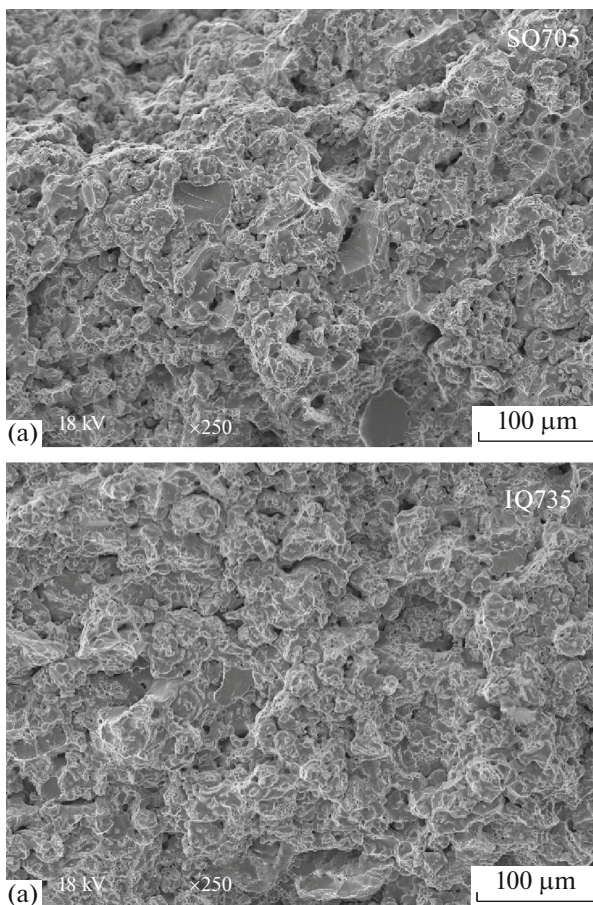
Fracture surface morphologies of (a) IQ705 and (b) IQ735 specimens.
